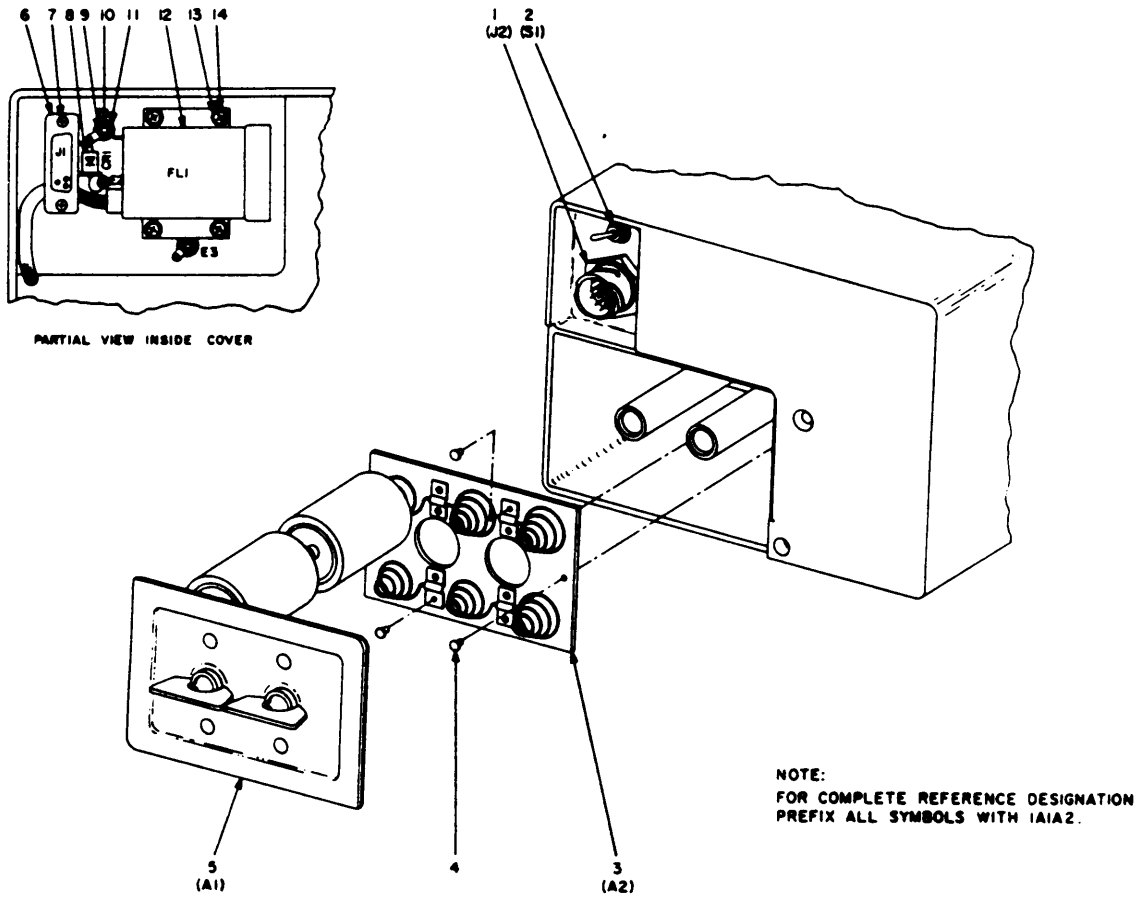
CIRCUIT CARD ASSEMBLY, REGULATOR, 1A1A1A5A2.
